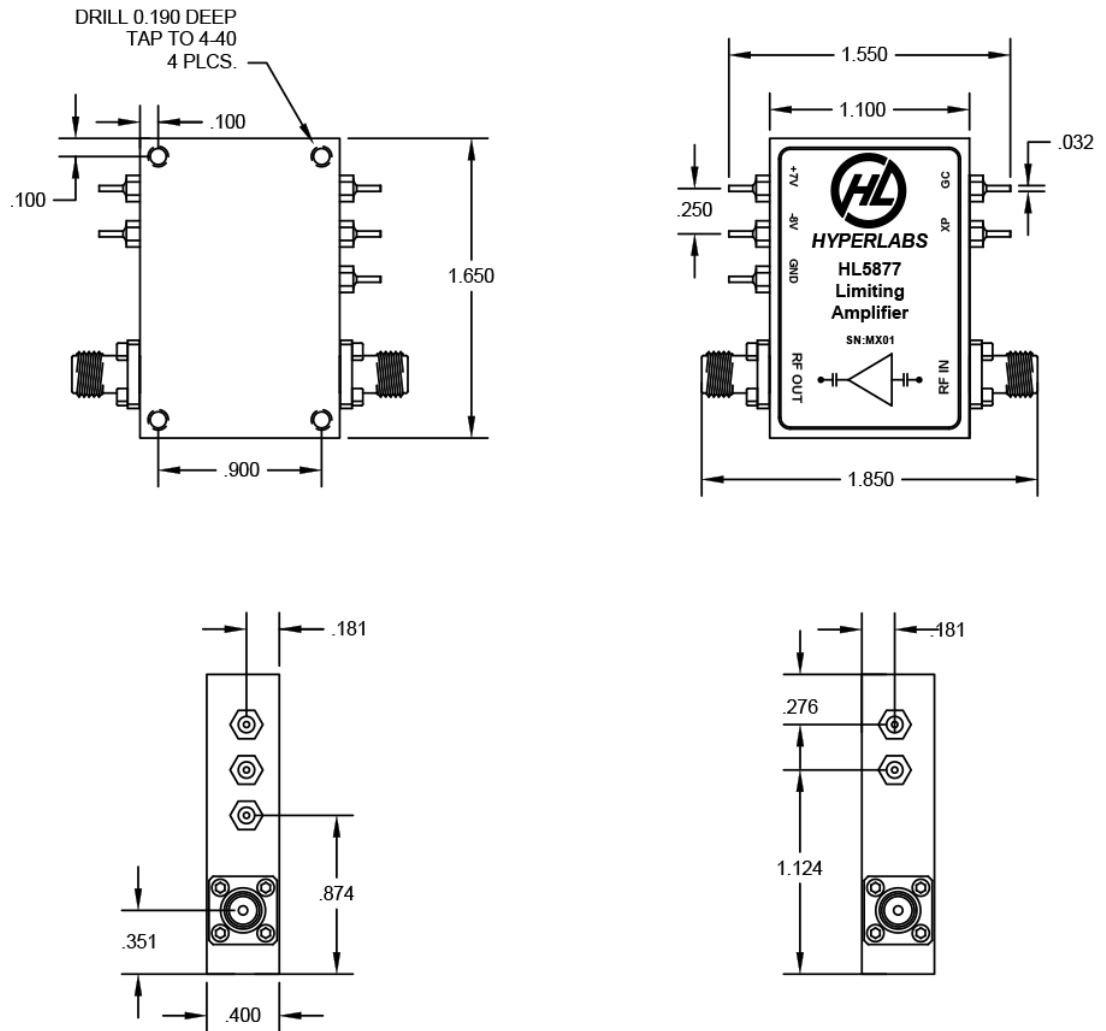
HL5877 mechanical drawing (opt. -29-JJ), inches
